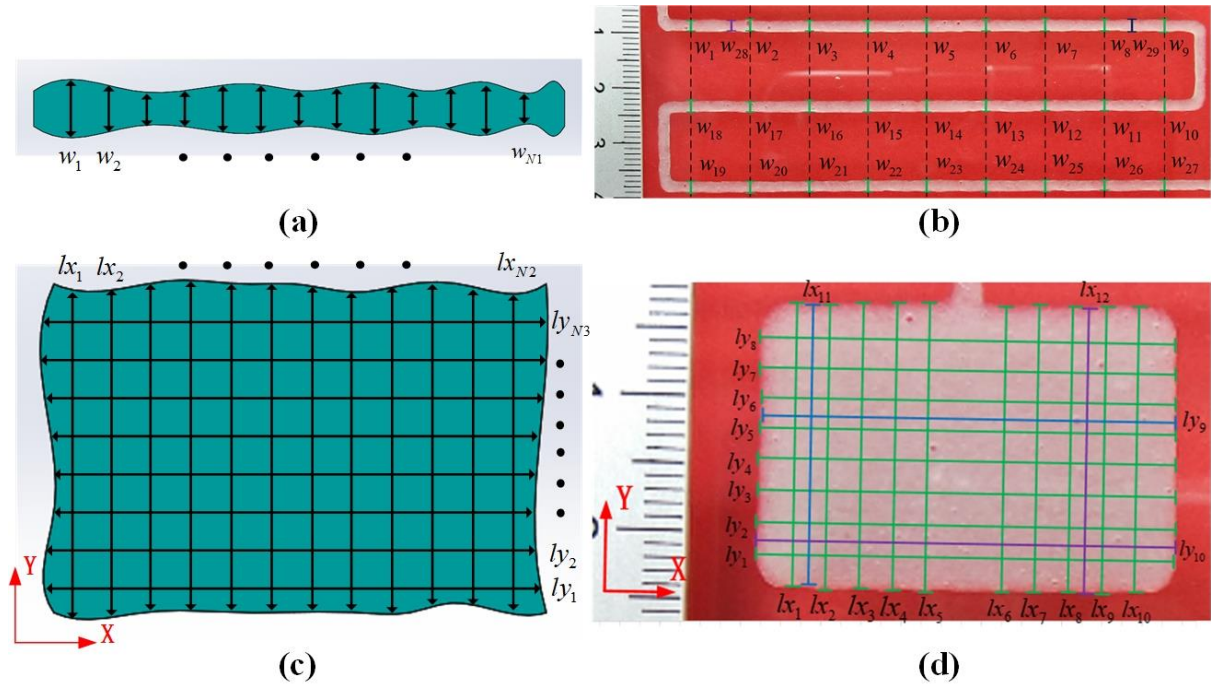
Definition and measurement method of dimensional errors: (a) definition of dimensional errors for printed lines; (b) measuring points setting for printed lines; (c) definition of dimensional errors for printed rectangular objects; (d) measuring points setting for printed rectangular objects
